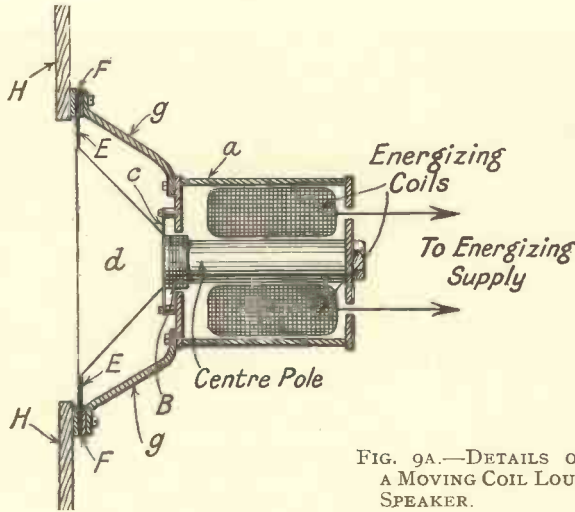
A.—DETAILS OF A MOVING COIL LOUD SPEAKER.
